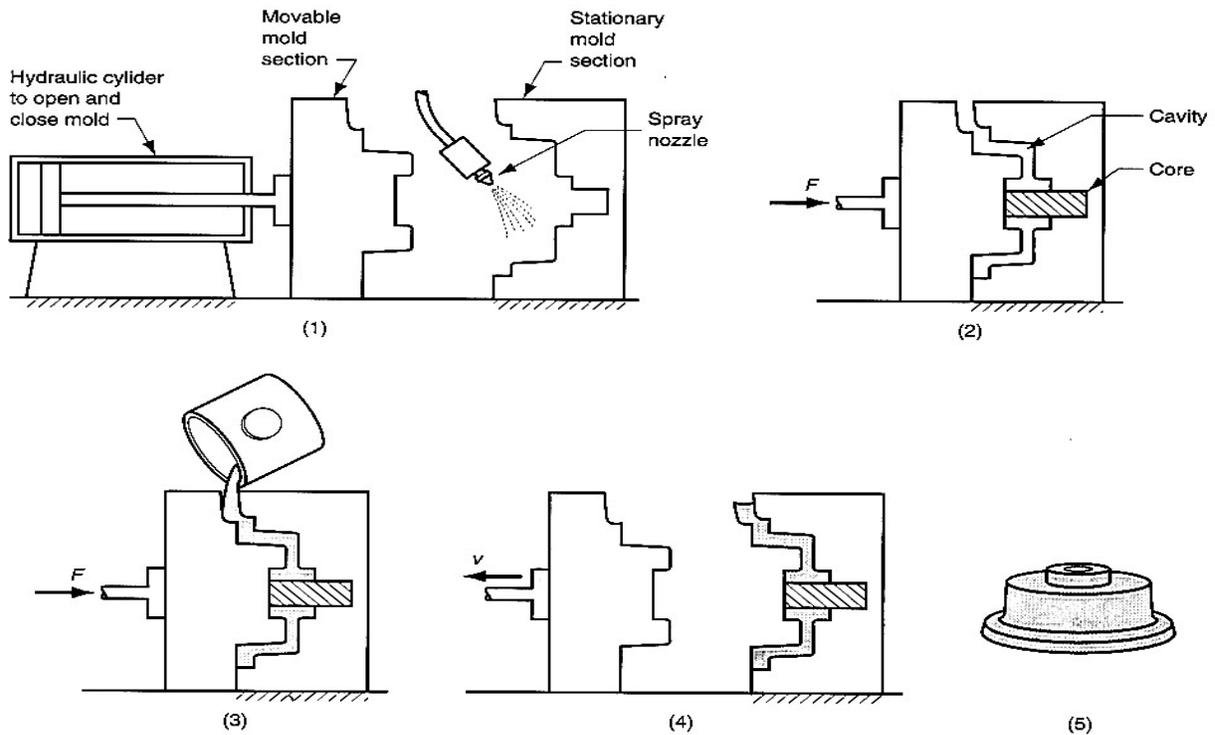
Steps in permanent mould casting: (1) mould is preheated and coated with lubricant for ease of separation of the casting; (2) cores (if used) are inserted and mould is closed; (3) molten metal is poured into the mould; and (4) mould is open and finished part removed. Finished part is shown in (5)
